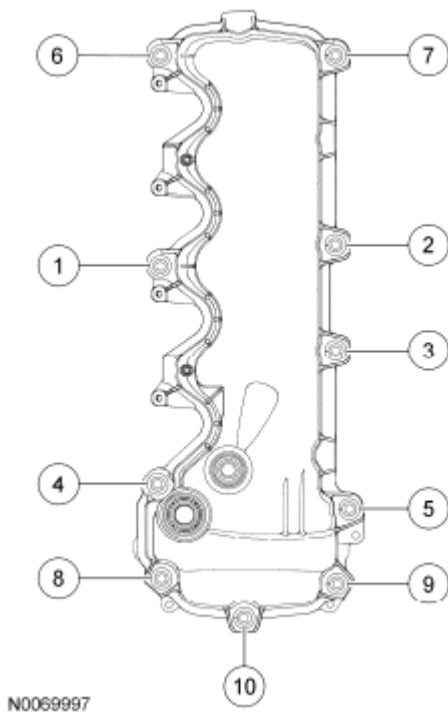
Identifying Cylinder Head Bolt Tighten Sequence
